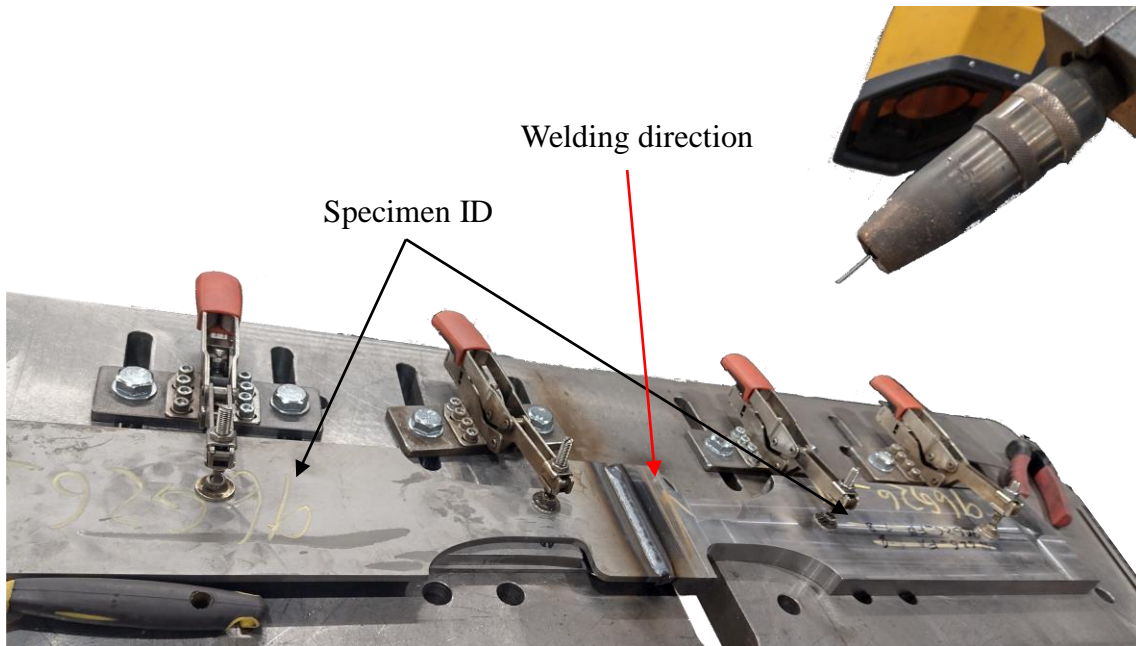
Welding setup and markings on specimens. On this image, wings that have welding start and stop points, can be seen.
